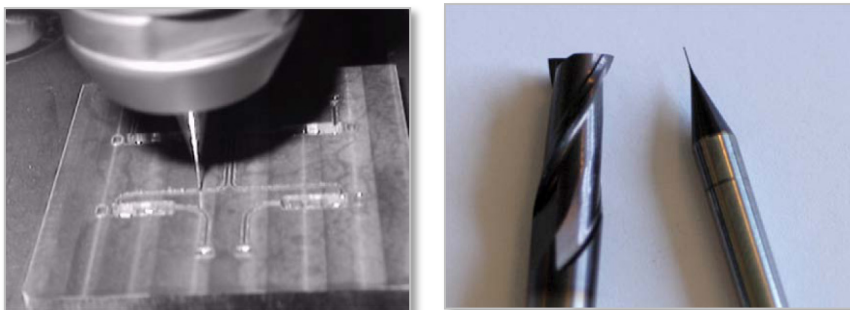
Examples of structures realized by micro milling and tools used for micro milling process [Bissacco, 2004].
